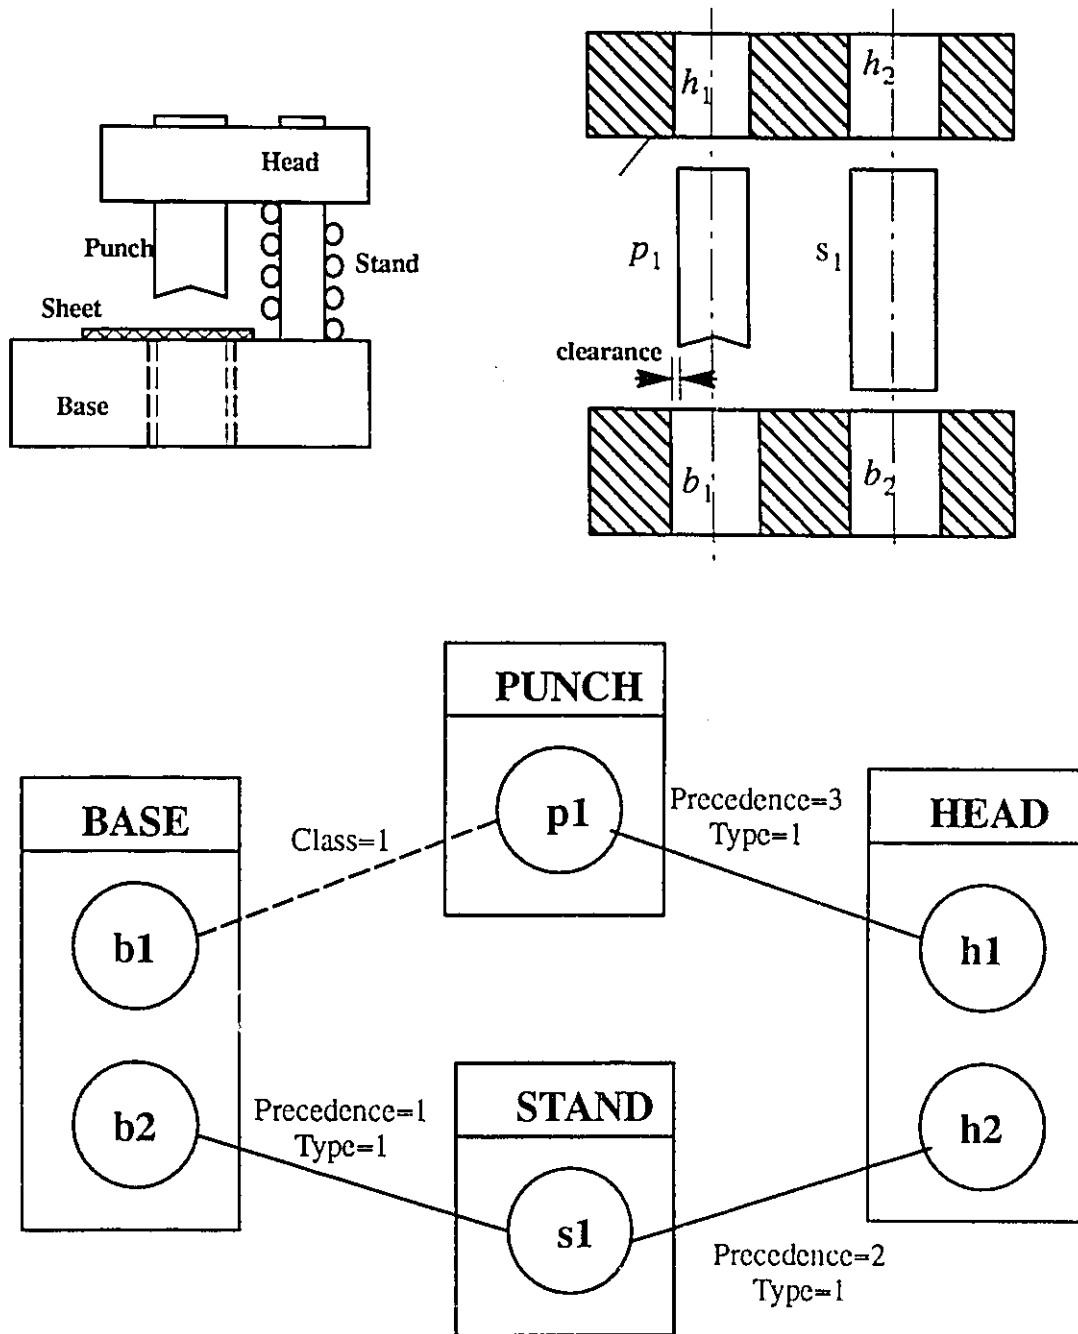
Assembly Sequence Graph of a Punching Machine
